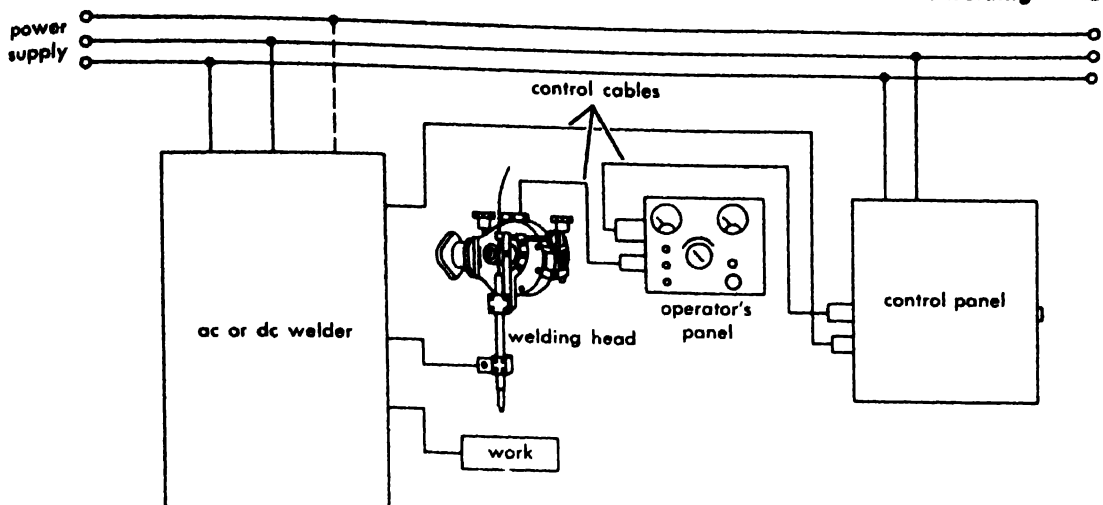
Schematic diagram of automatic wire feed and control for arc welding.
